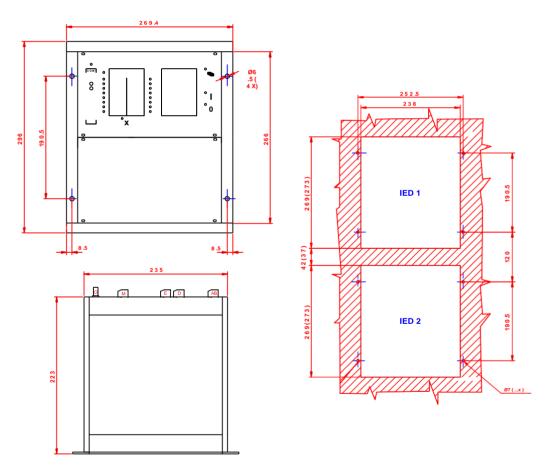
Dimensions for flush mounting of 42 HP double rack
